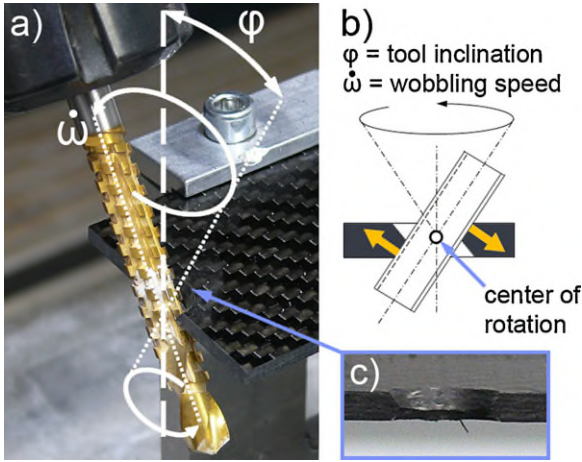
Basic kinematics of wobble milling (a and b), double cone geometry of the hole after wobble milling (c).
